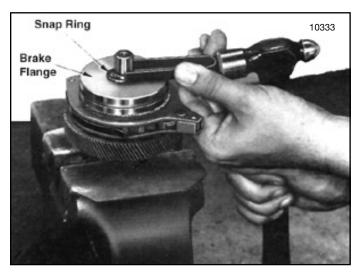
Removing Snap Ring from Load Brake Shaft
